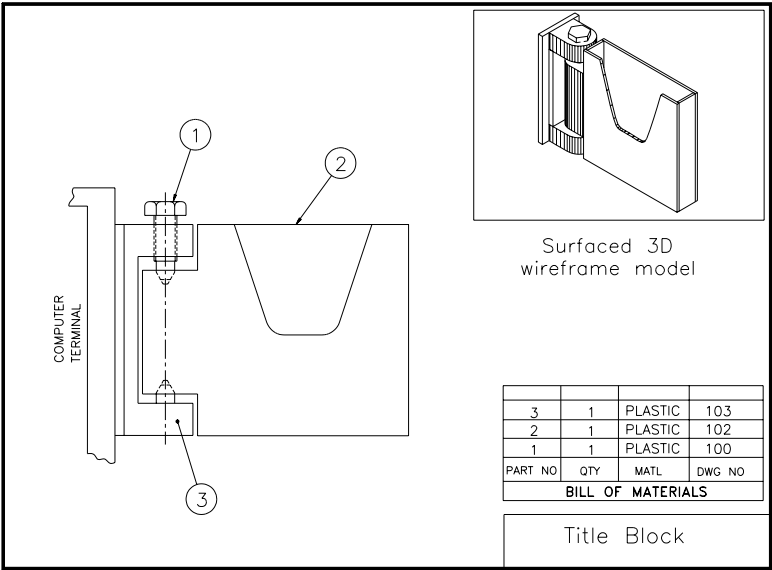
Assembly drawing with title block, bill of materials, and surfaced 3D wireframe model
